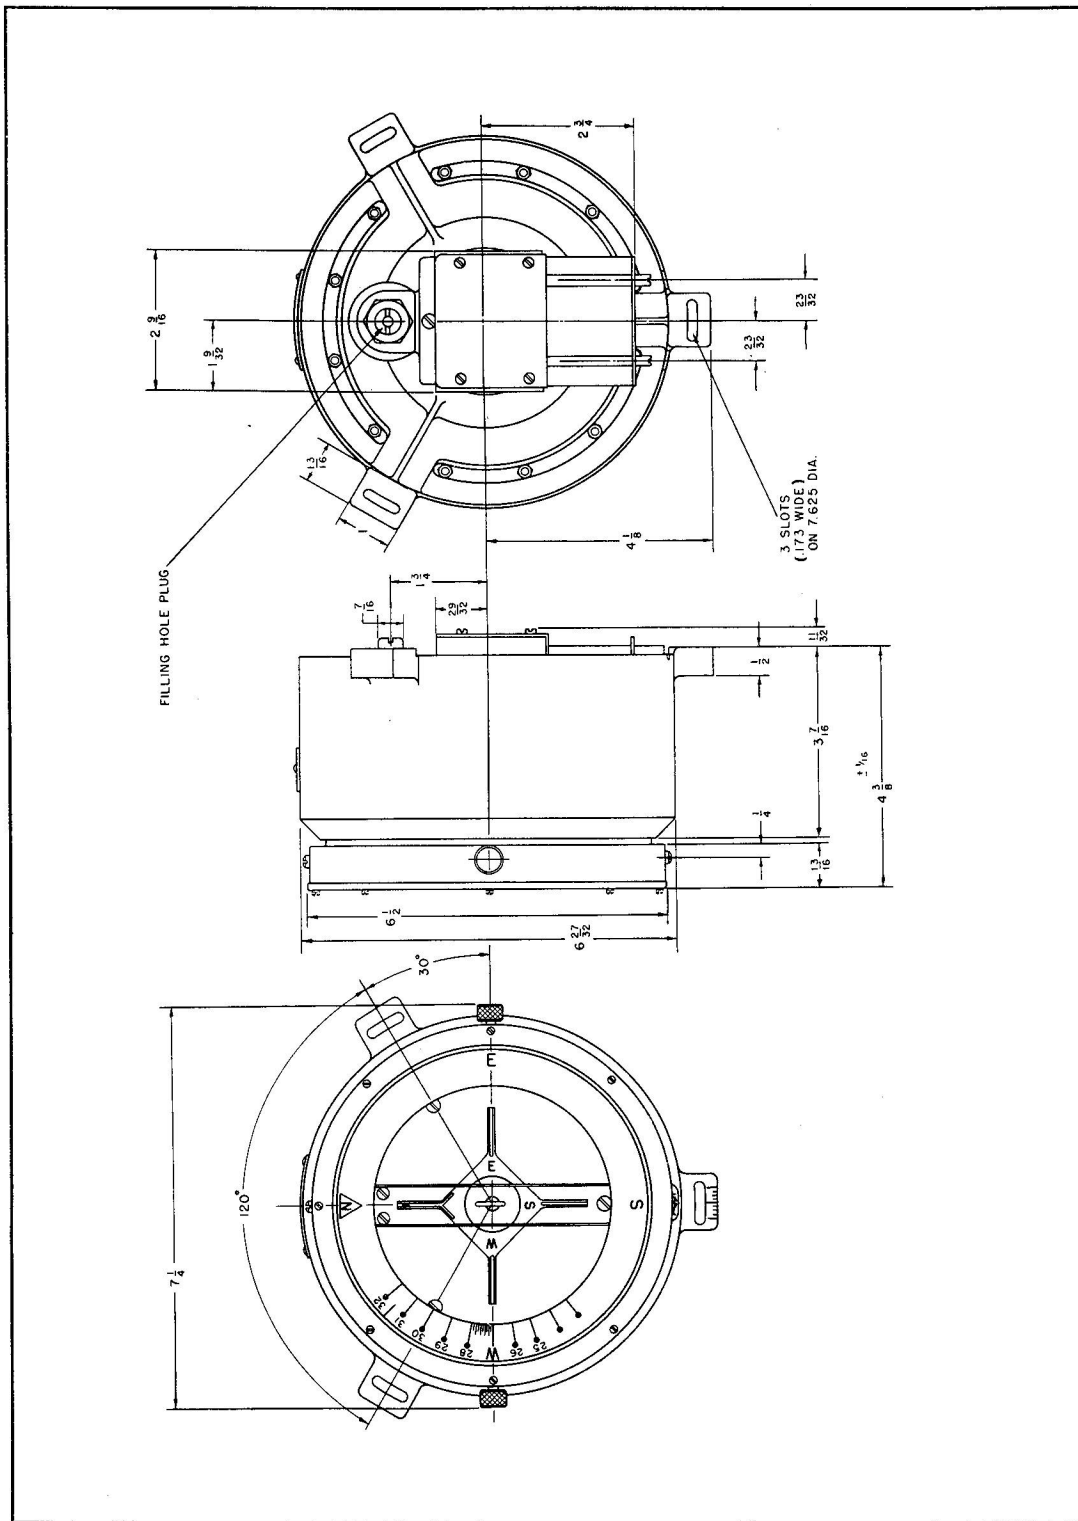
Dimensional Drawing - Type D-12 (Pioneer Types 1832-1-A, 1832-3-A)
